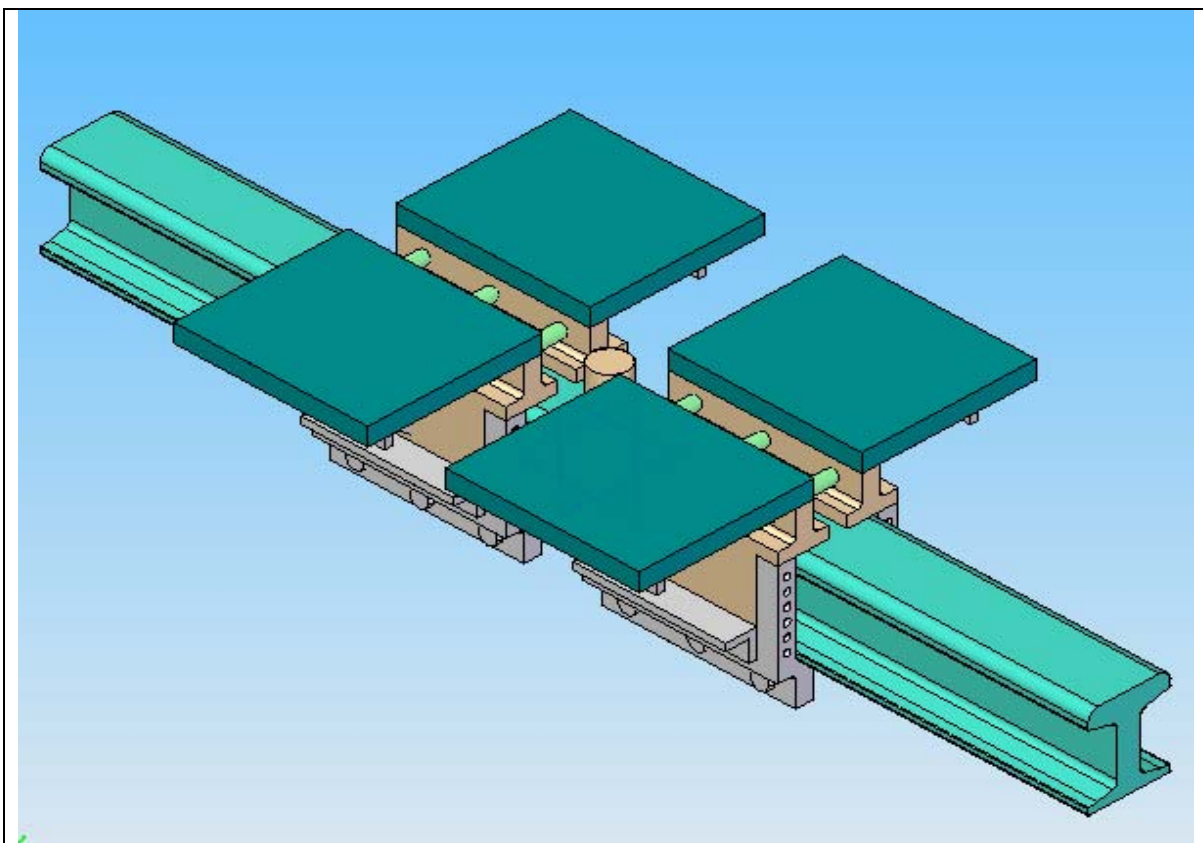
Bottom structure of a friction stir welding machine for joining rails
